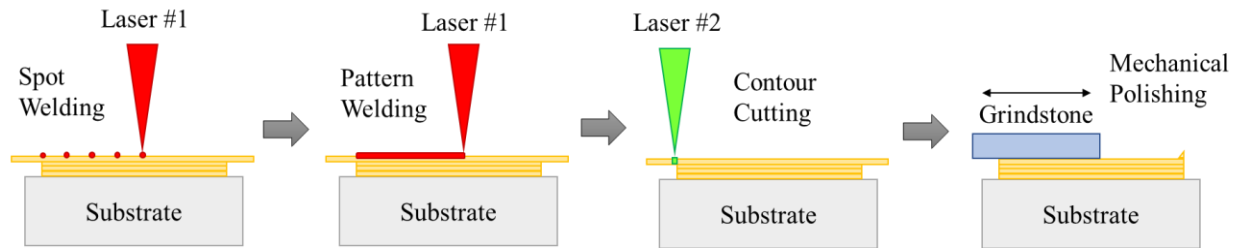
Illustration of the current process steps of LFP. From left to right: spot welding, pattern welding, contour cutting, and edge polishing. [11]
